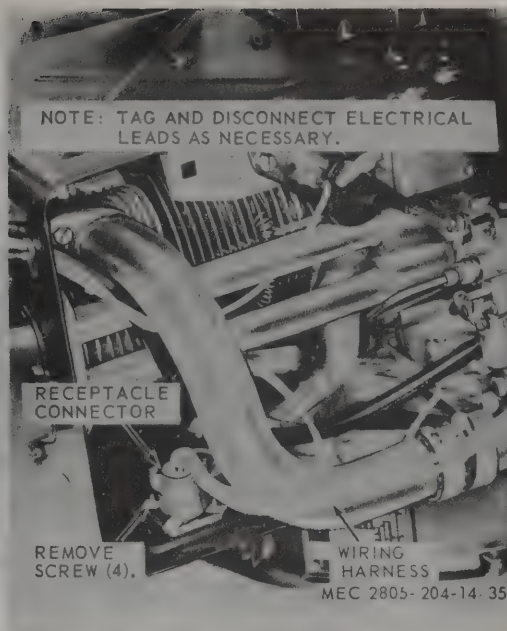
Receptacle connector and wiring harness, removal and installation.
